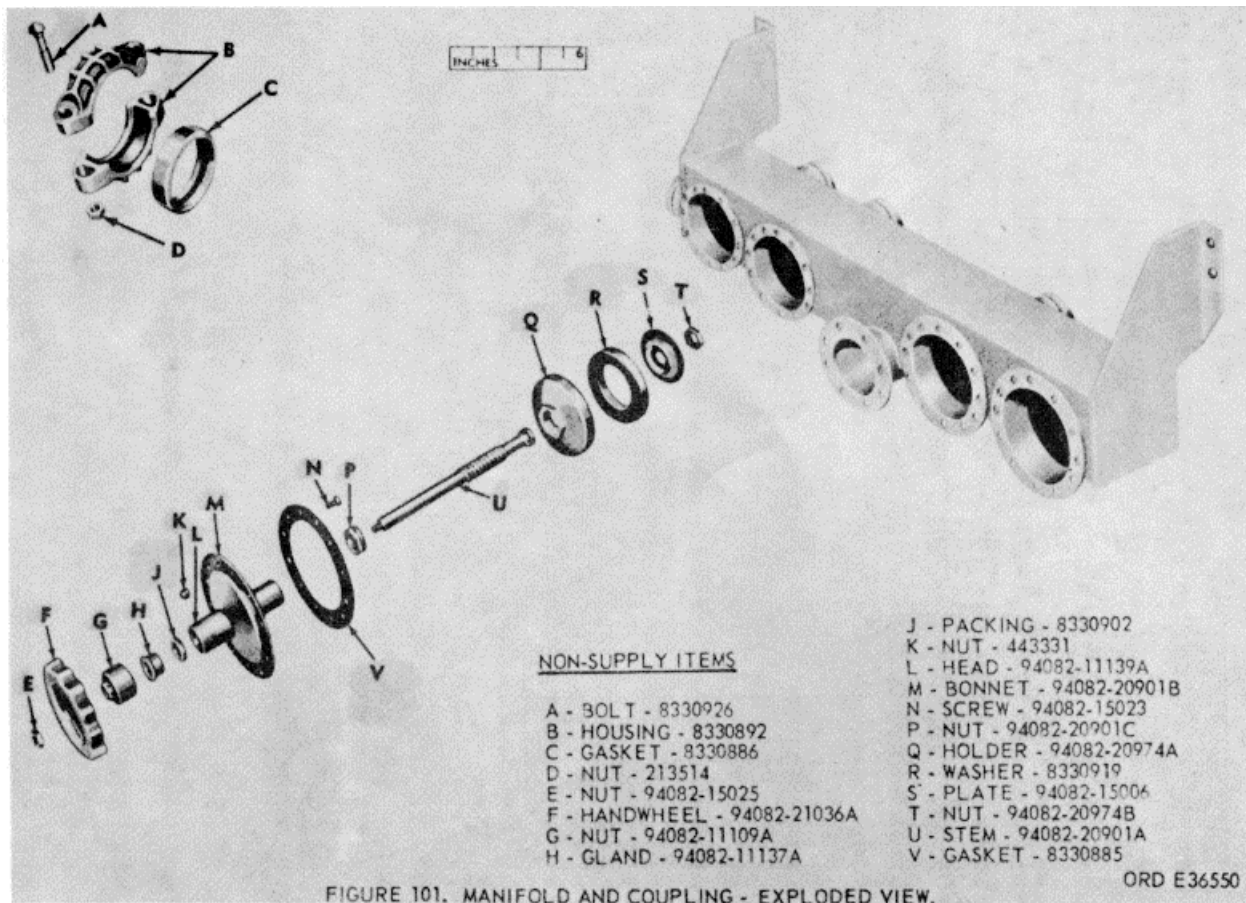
MANIFOLD AND COUPLING - EXPLODED VIEW.
